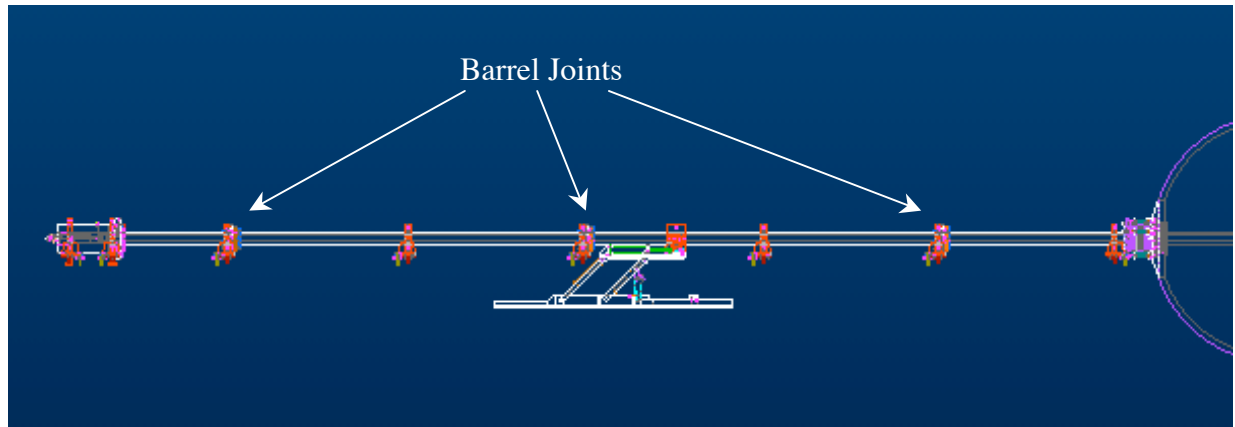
Schematic drawing of 100 mm gun assembly showing the breech assembly at left, barrel joints, collar supports, shock absorber damping system (center) and experiment tank (at right).
